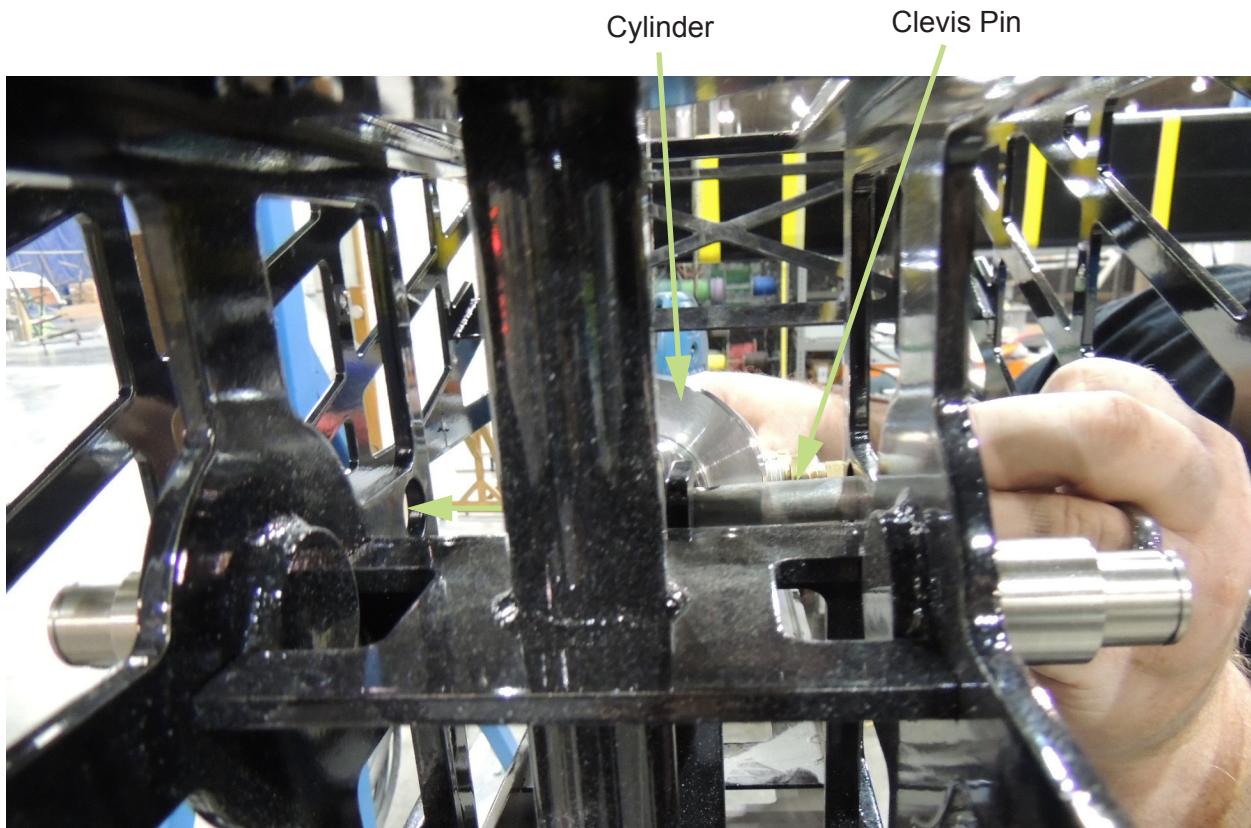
Main Cylinder - Installing Clevis Pin on Upper End
